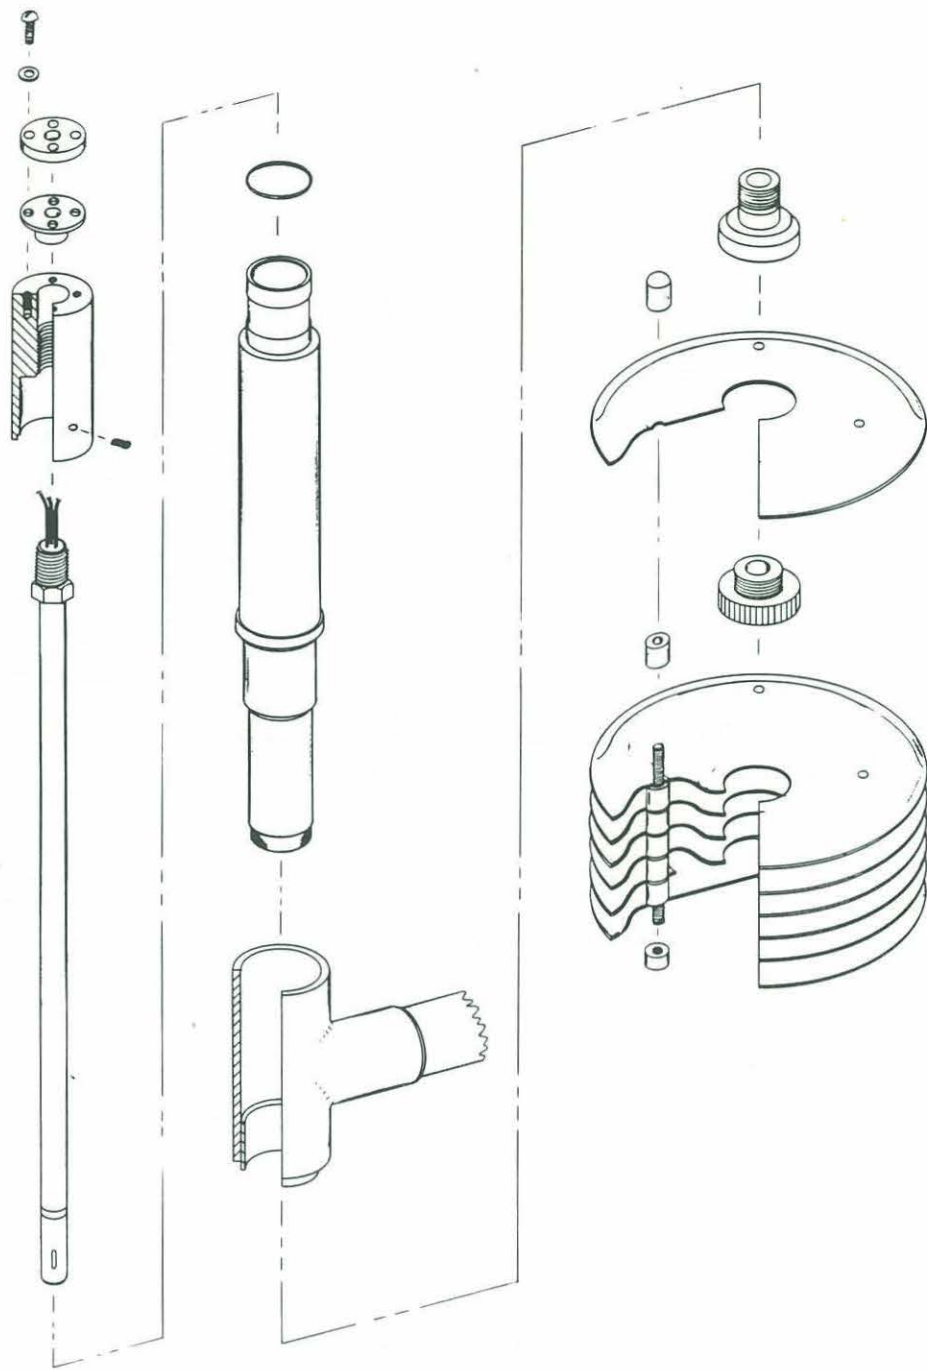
Exploded view of the HyCal relative humidity sensor, mounting brackets and radiation shield.
